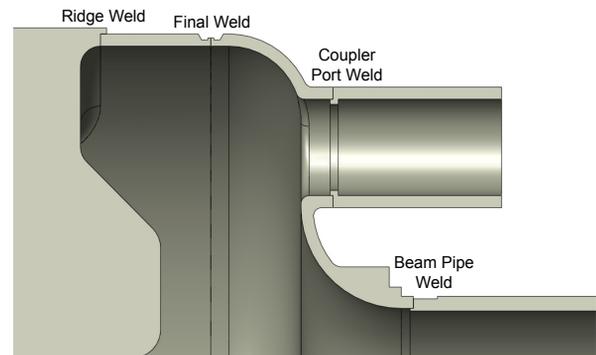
Details of the weld preparations for the cavity welds. The final weld will require a full penetration weld using a TIG welder from the outside of the cavity.
